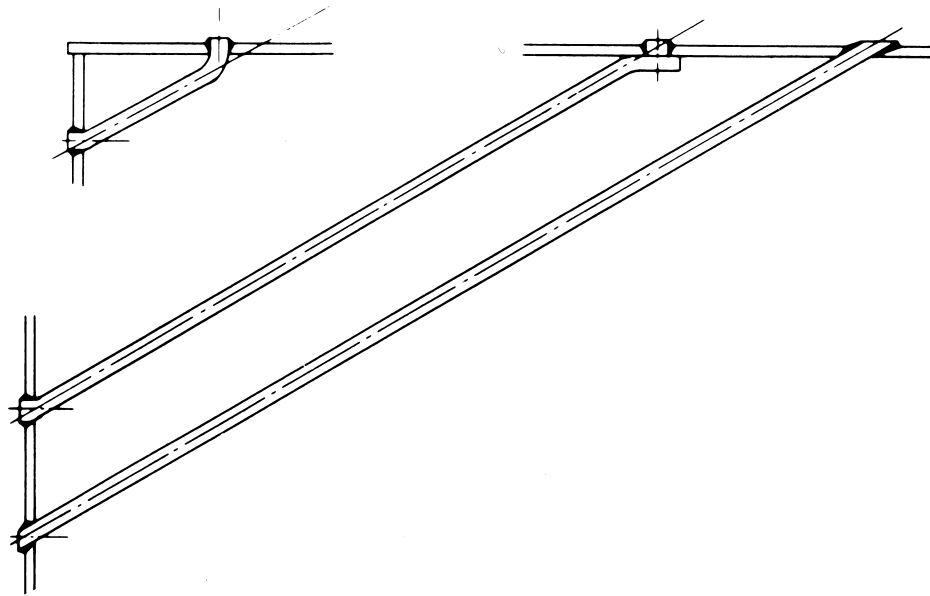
(b) UNACCEPTABLE TYPES OF DIAGONAL BRACES FOR INSTALLATION BY WELDING
